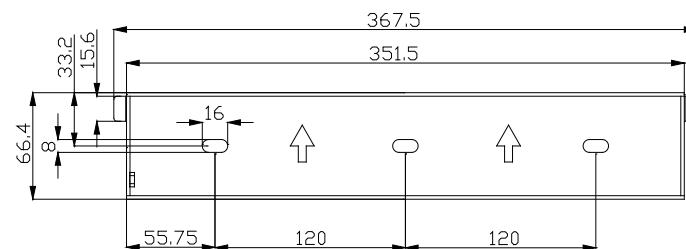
Dimensions of rear panel of R5-7K/8K-S2
